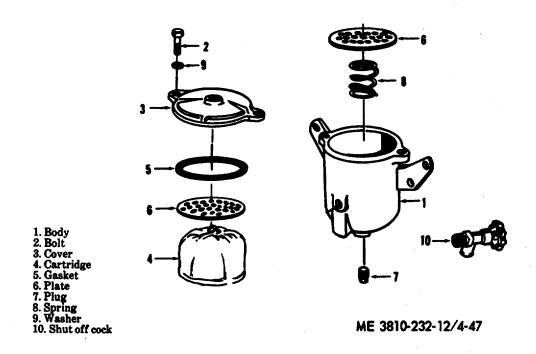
Carrier engine cooling system water filter, disassembly and reassembly.
